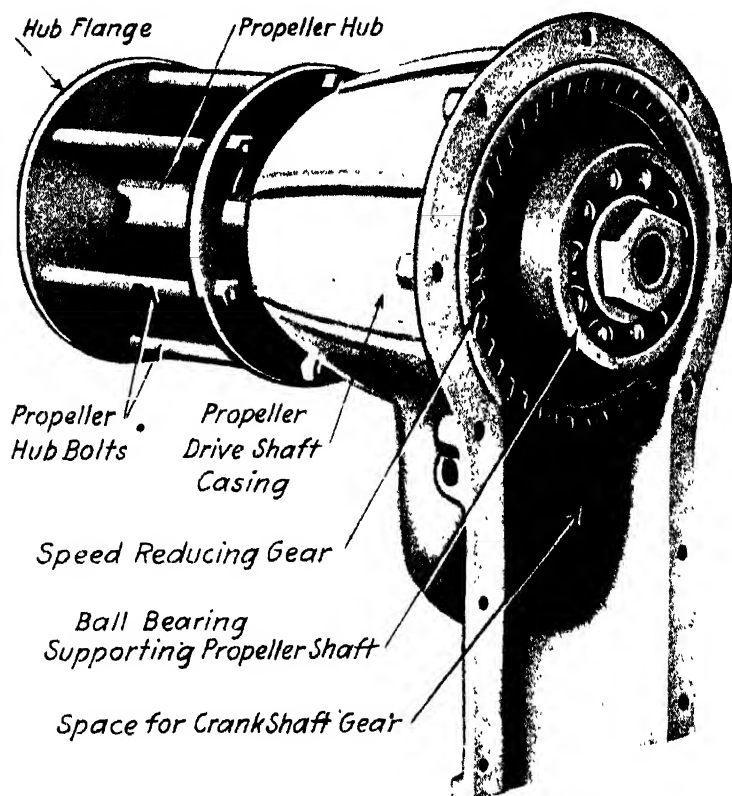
Showing Arrangement of Geared Down Propeller Drive.
